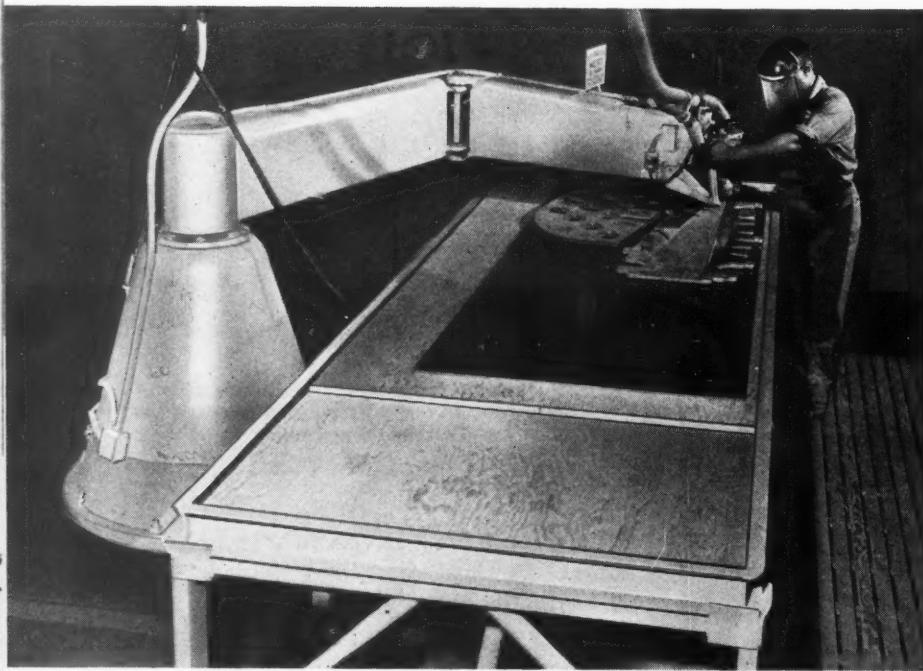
The radial-arm router is especially advantageous for contour cutting of stacks of laminated plastic sheets.
